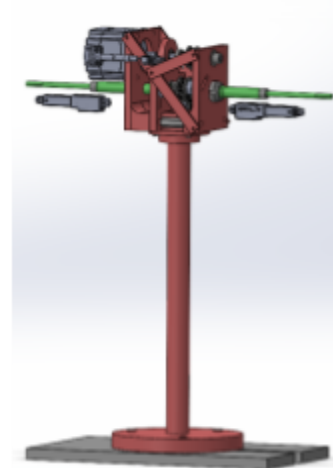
Assembly drawing of turbine structure including rotor and blade shaft and support structures (green) and major chassis and tower components (red).
